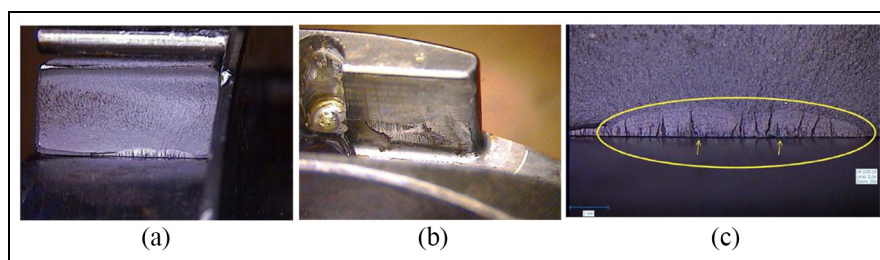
Failures of DMF springs: (a) fracture surface inside the spring holder, (b) detail of the inner spring holder, and (c) detail of the fracture surface.
